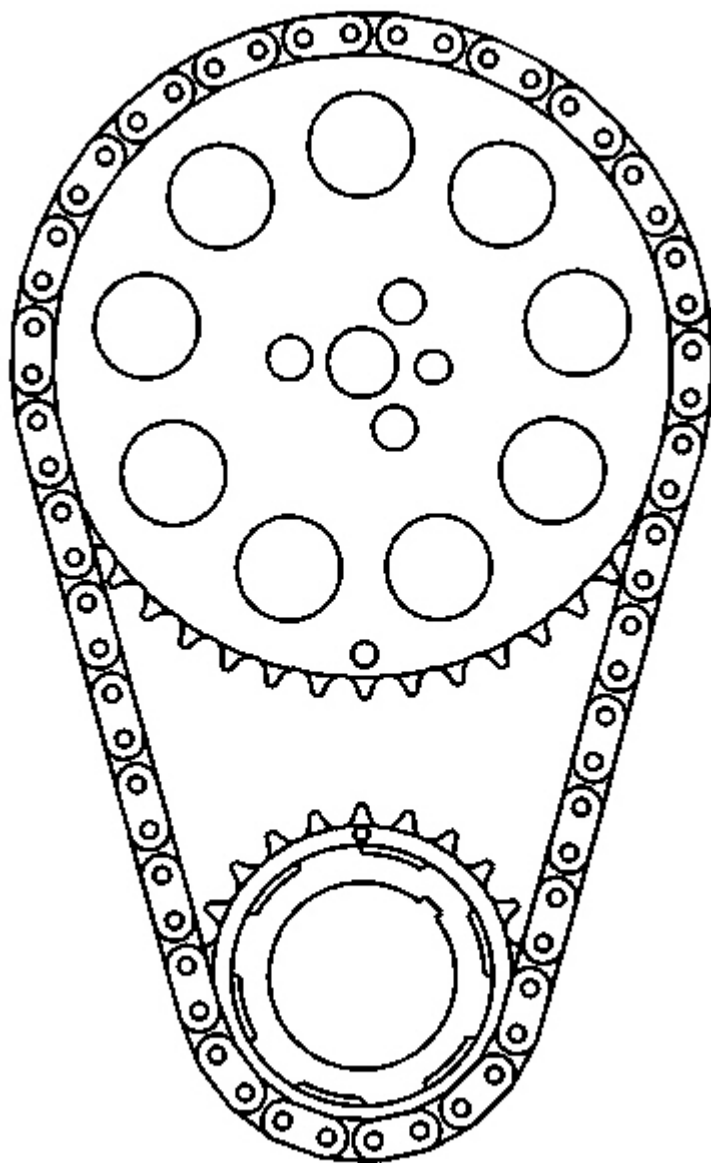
View Of Camshaft & Crankshaft Sprockets Timing Marks Aligned
